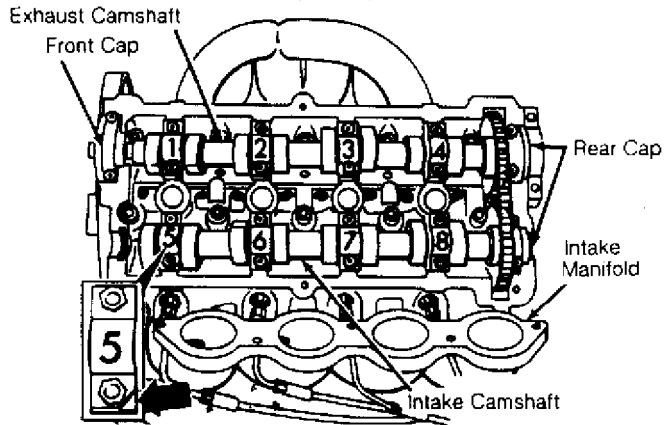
Identifying Camshaft Bearing Caps (2.0L)
